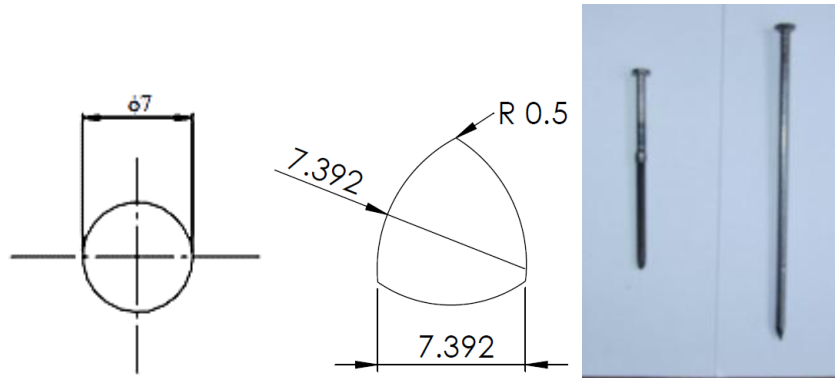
a – a Reuleaux Triangle; b – a scheme for determining the elastic section modulus S; c— a nail with a Reuleaux Triangle section
